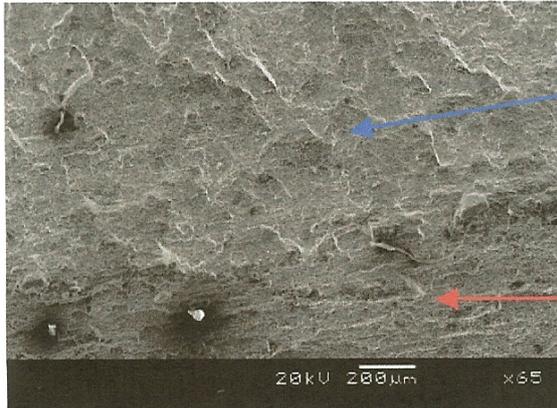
Fracture surfaces, point B (stereo)
